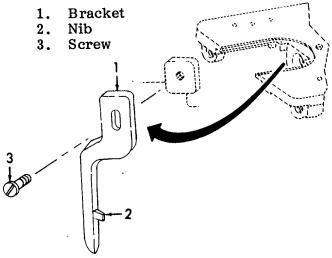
Bobbin Case Positioning Bracket, Installation.
